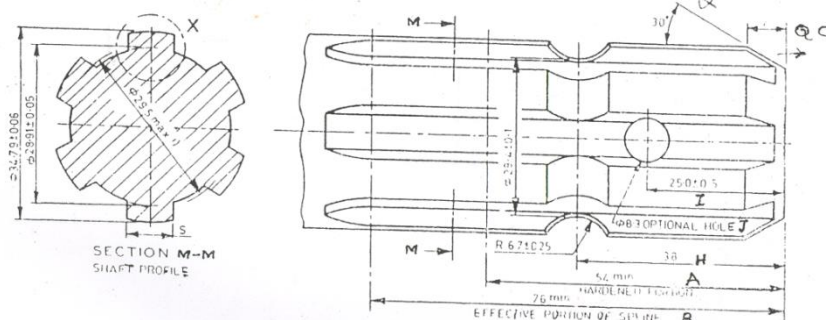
Dimensions of Implement Power Input Shaft, mm
